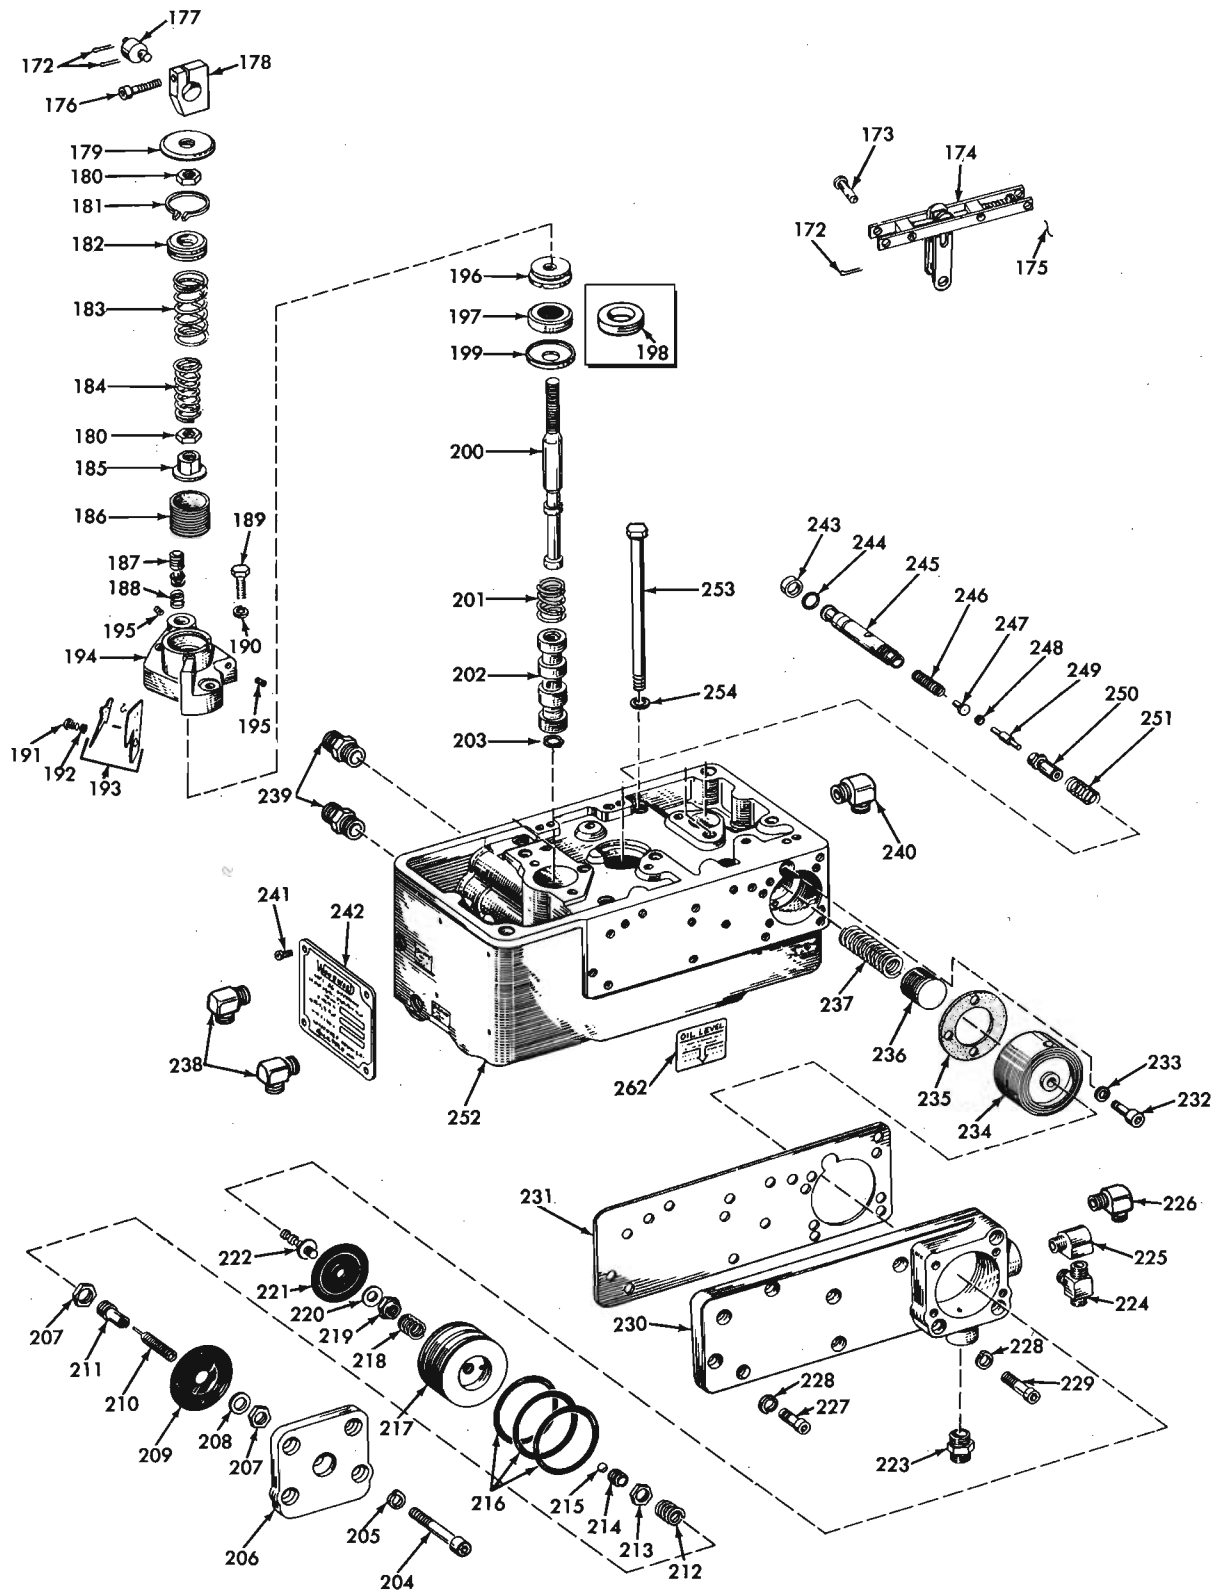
Load Control Valve, Overriding Valve, Oil Failure Shutdown Valve, Column, Tubing Connections, Pipe Plugs, etc.
